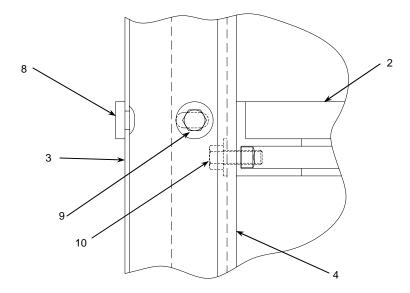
ADR-300 Shelf Assembly (Sheet 2 of 2).
